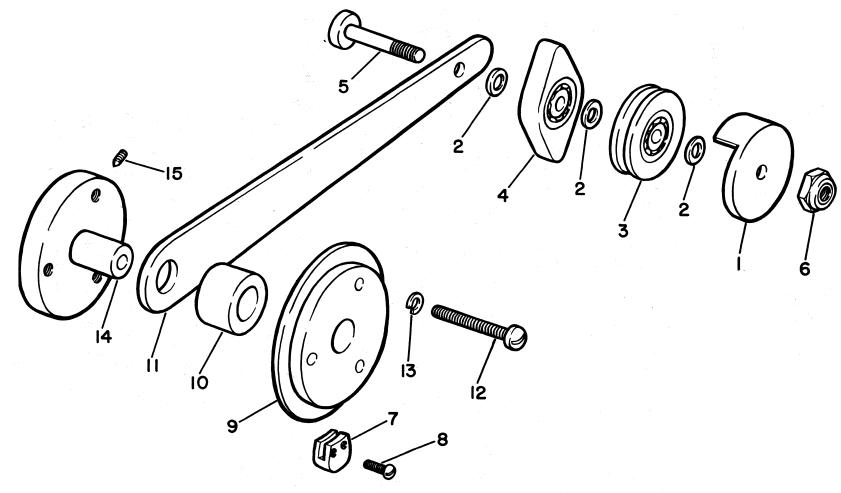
500 808 00 AUTOSYN ARM ASSEMBLY-EXPLODED VIEW
